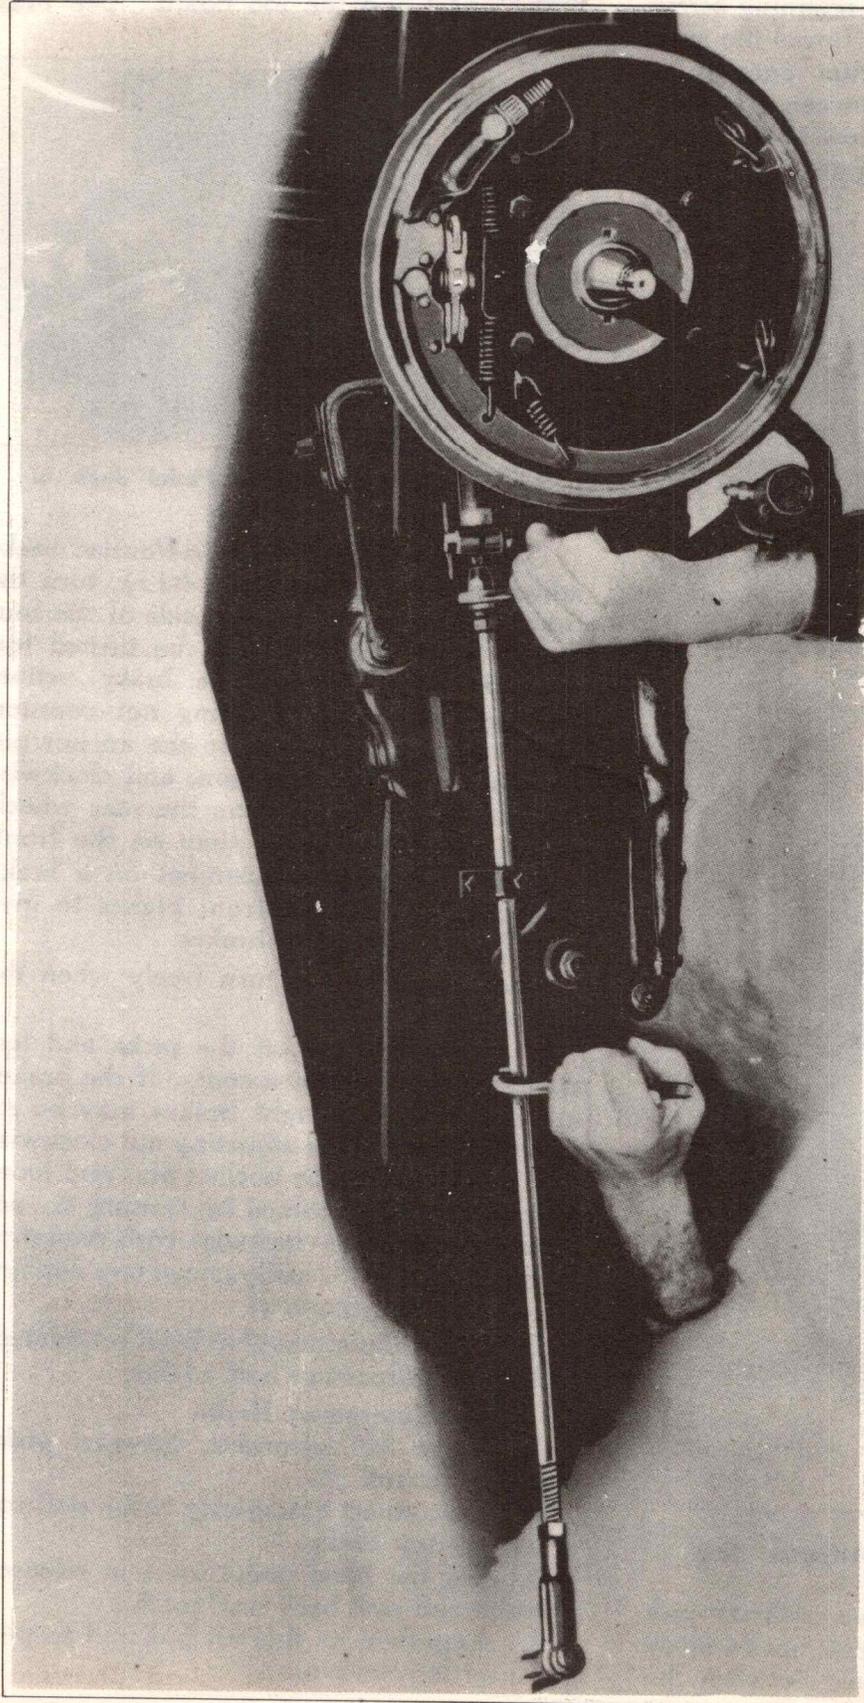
Adjusting Brake Rod for Anchor Pin Clearance
